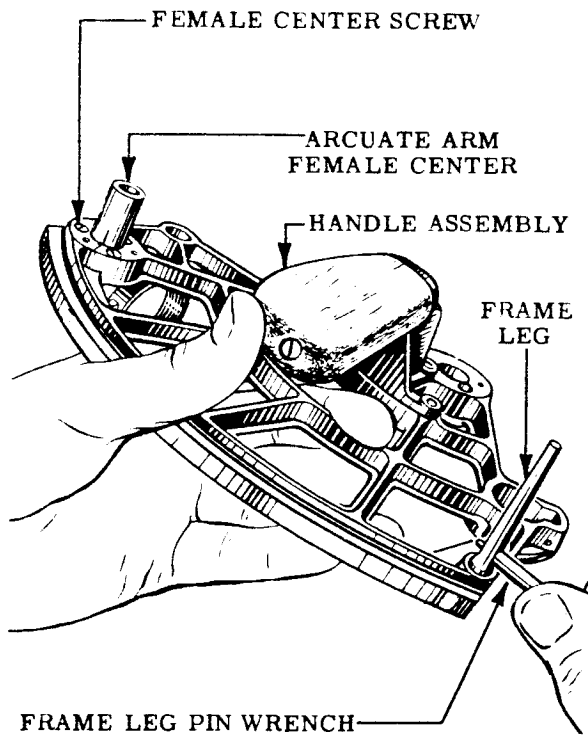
Removing the Frame Leg, the Arcuate Arm Female Center, the Handle Assembly, the Telescope Holder and the Radius Arm Stop Screw
